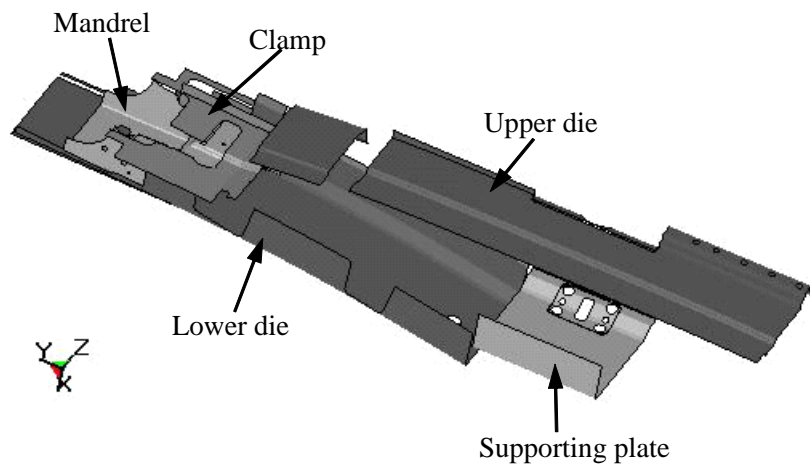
Tooling used for stretch-bending of bumper beam.
